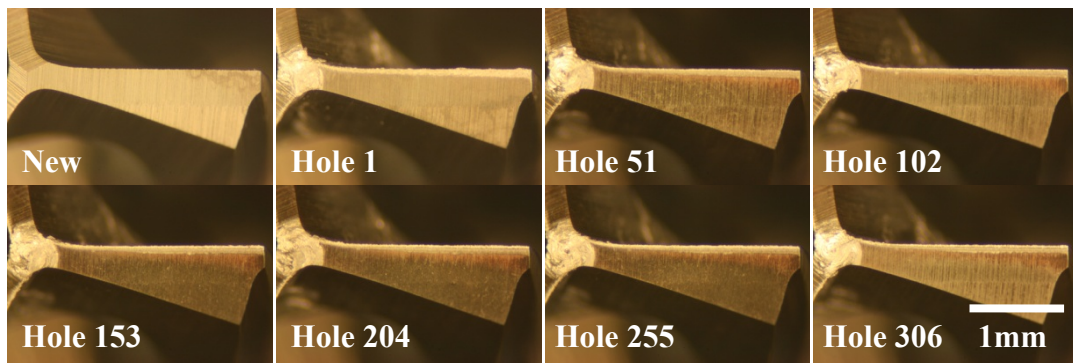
Tool wear micrographs of uncoated carbide drill under 70bar cutting fluid, 260m/min cutting speed (Test 8)
